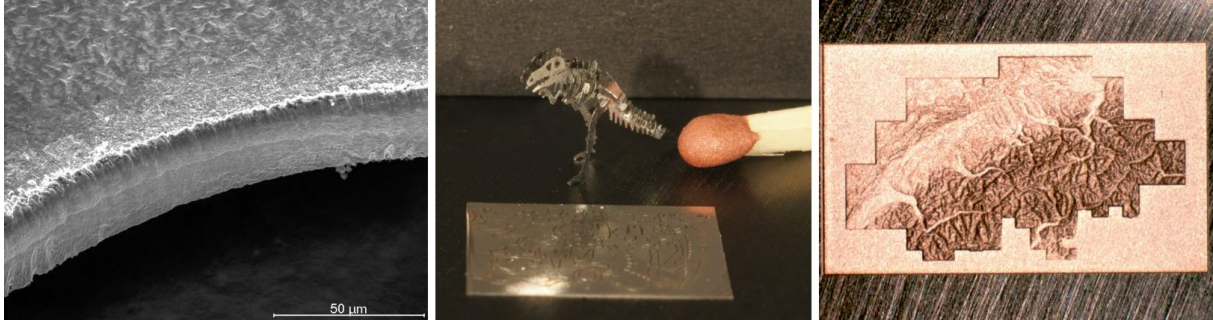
Examples for metal processing with ps-pulses. Right: Big hole in a thin steal foil. Center: Self assembly kit and mounted T-Rex cut in 50 μ m thick steal foil. Right: Topography of Switzerland in a copper blank. The dimensions are about 10x6mm and 80 μ m depth only cleaned with acetone and lens cleaning paper. The metallic brilliance shows that now oxidation process has appeared.
